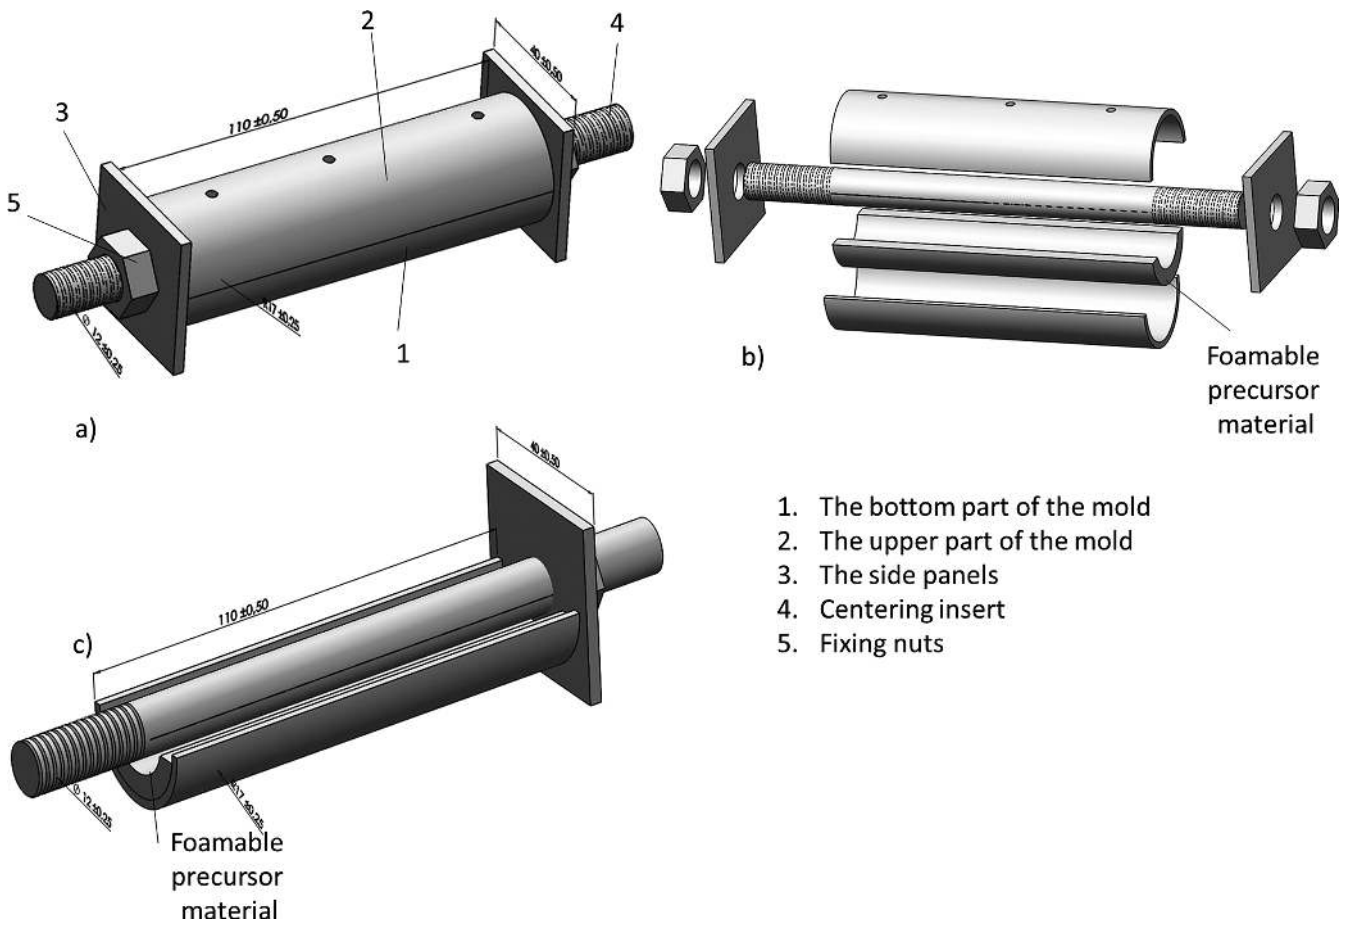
(a) Foaming mold (assembly drawing), (b) foaming mold parts, (c) position of foamable precursor material in mold.
